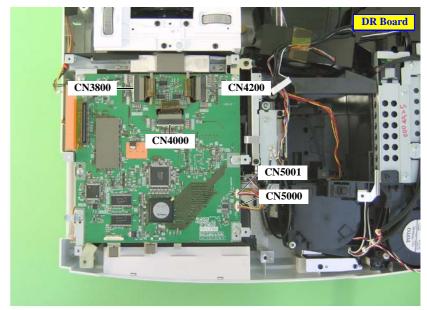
Connector layout of the MA Board/ DR Board (EH-TW4500/5500)
